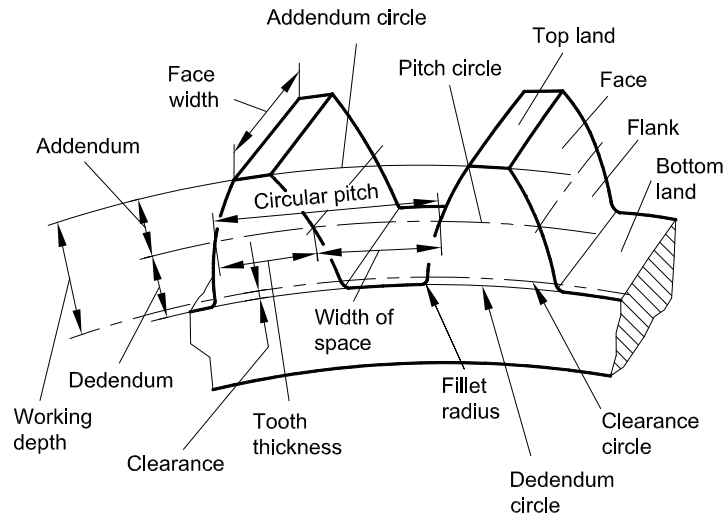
Presenting part of a gear tooth in axonometric projection
